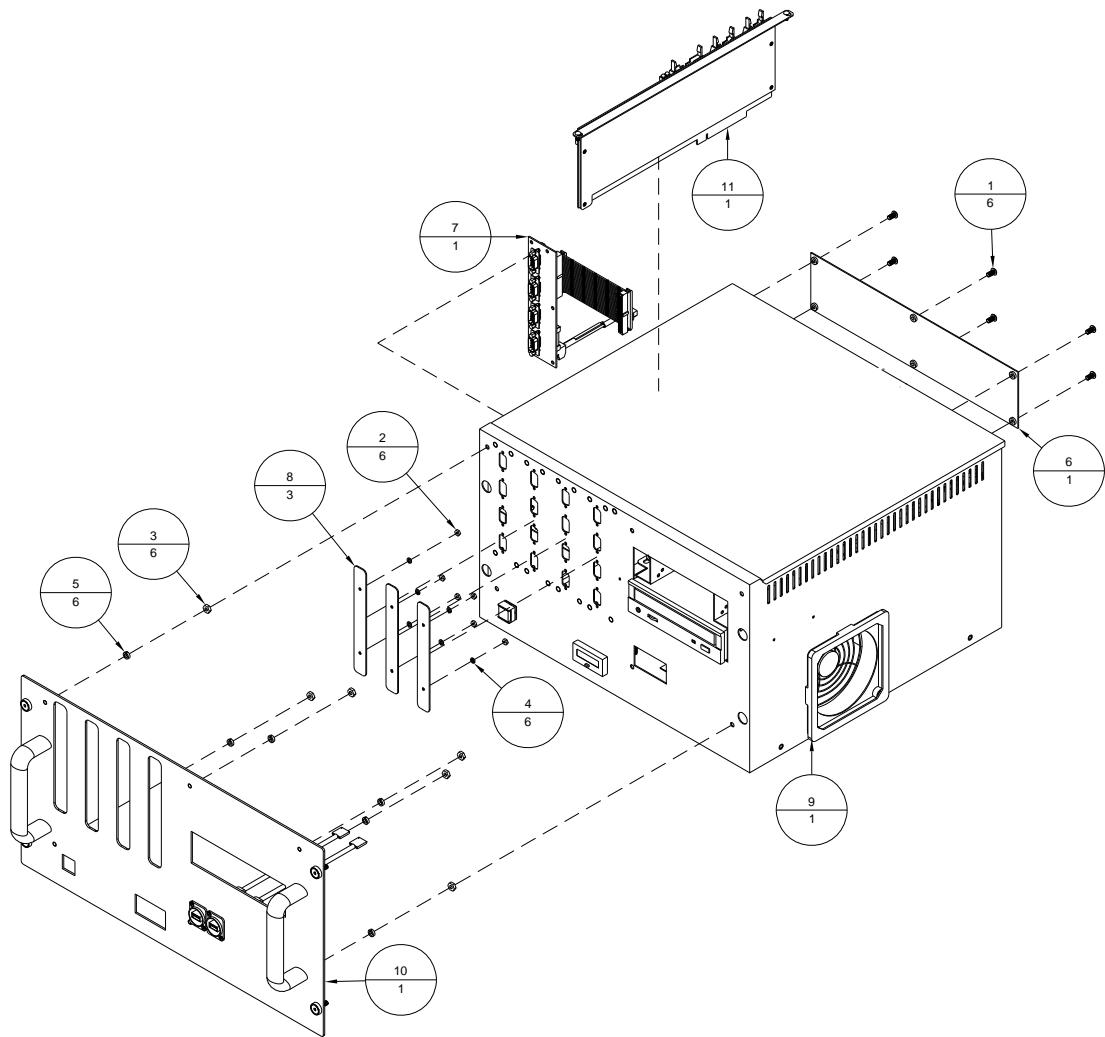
BK-PCM-16 – Module, Computer Assembly
